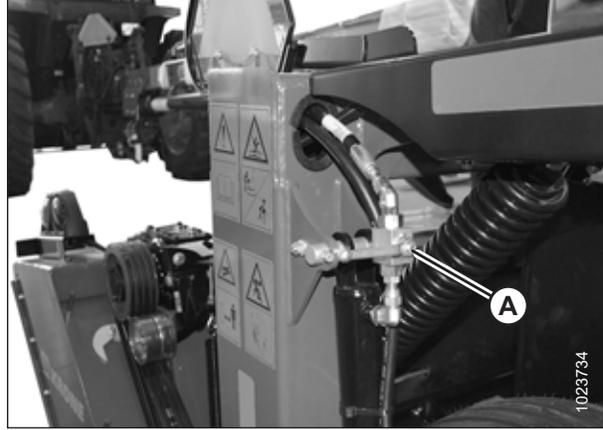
Lift Cylinder Lock-Out Valve in Closed Position
